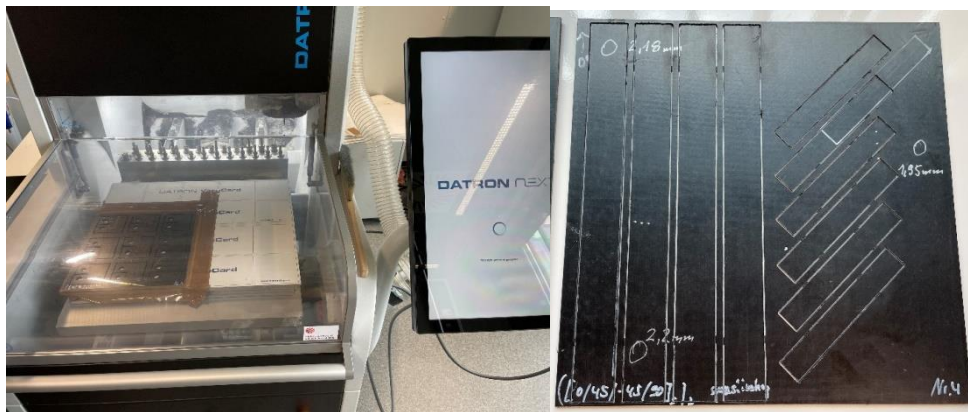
Milling machine during process (left) and milling layout for laminate ID #4 (right)
